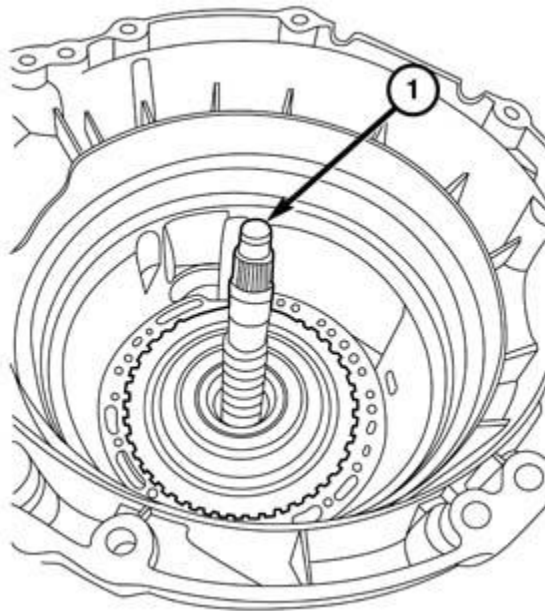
Outer Bearing Snap Ring & Outer Needle Bearing
